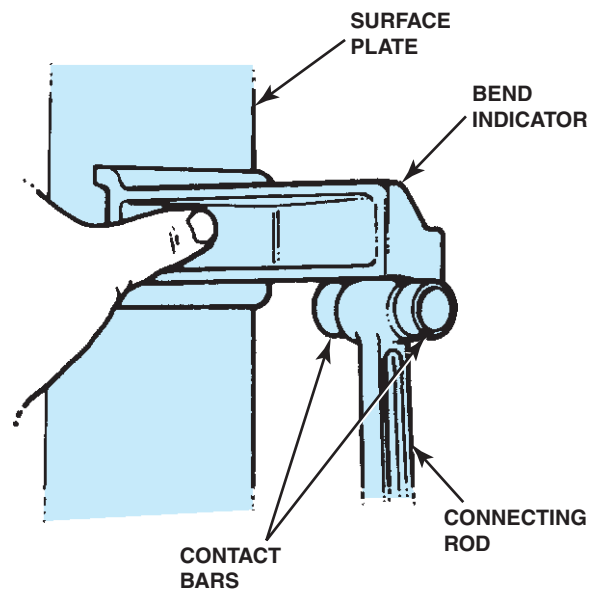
A rod alignment fixture being used to check a connecting rod to see if it is bent or twisted.
